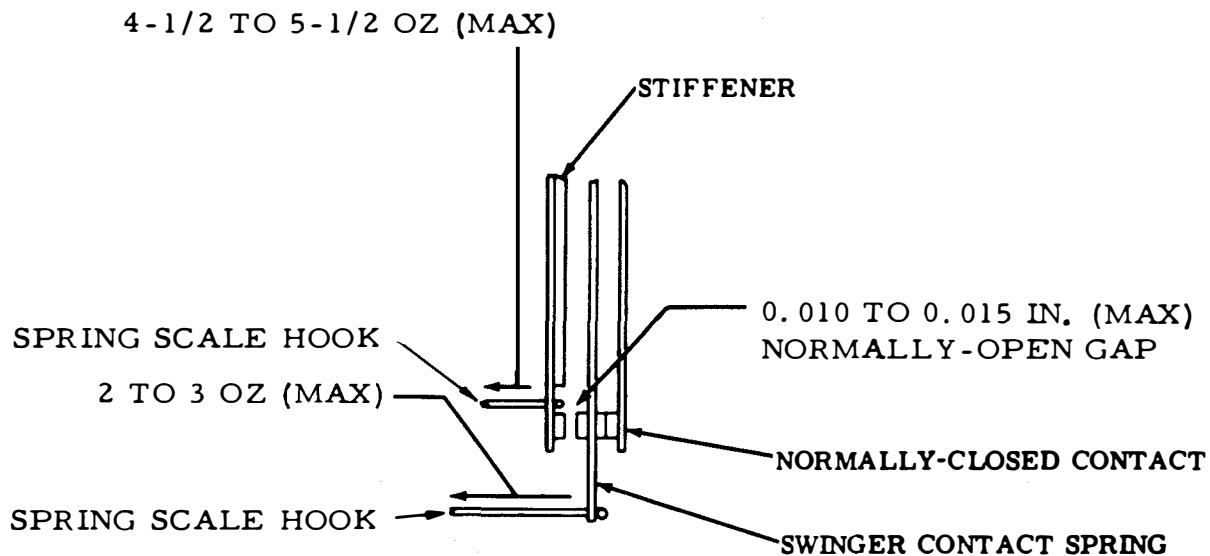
Open Contact Gap, Contact Spring, and Swinger Contact Spring
